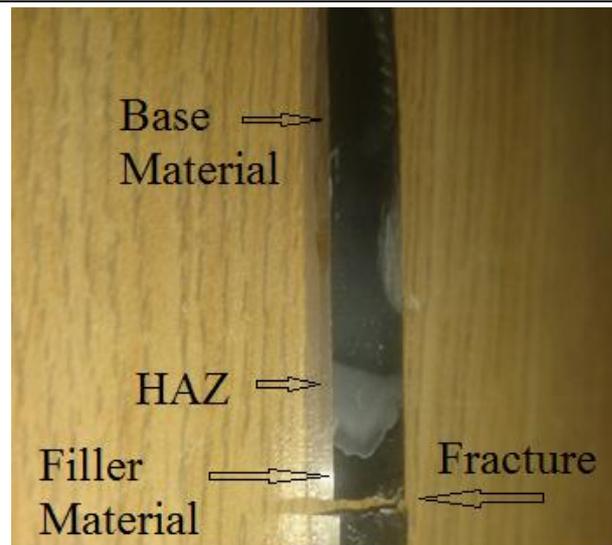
Fractured sample after the tension test, showing that failure occurs on the filler material and not in the HAZ interphase.
